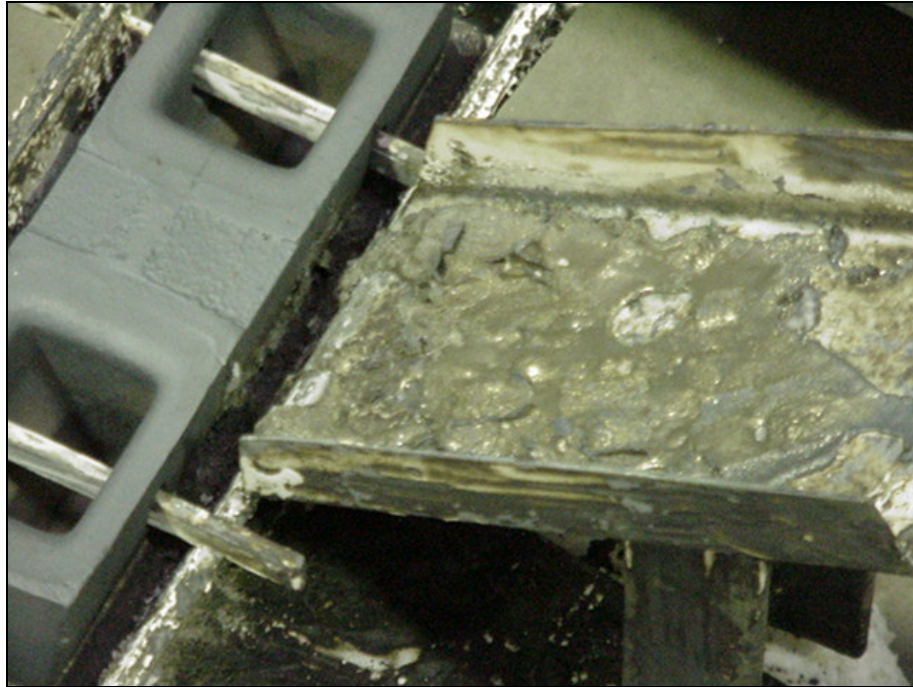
Detail view of completed wide bucket lip still in the mould after casting. Note the presence of a small amount of white iron “skin” left in the chute.
